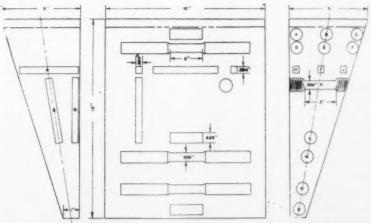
SKETCH SHOWING LOCATION OF PHYSICAL TEST SPECIMENS.
